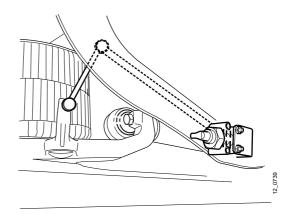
The front level sensor is located on the crossmember under the gearbox.
